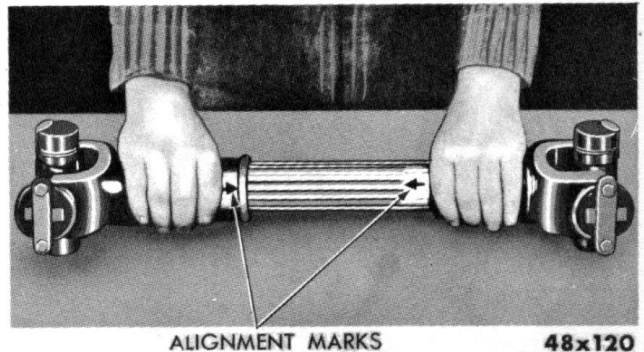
Arrows on Yoke and Shaft Properly Aligned
